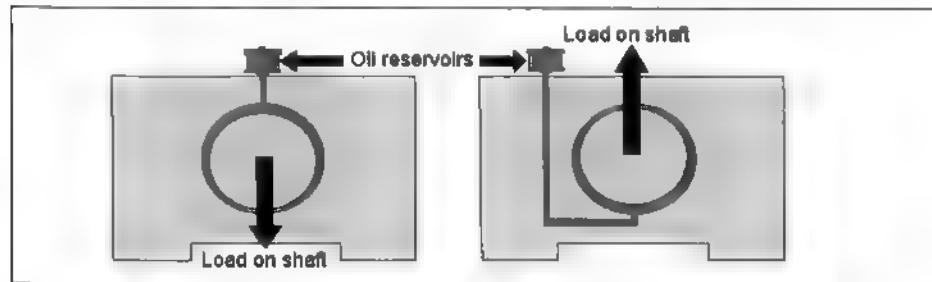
Oil should, if possible, be fed to the part of the bearing where the pressure is lowest.
